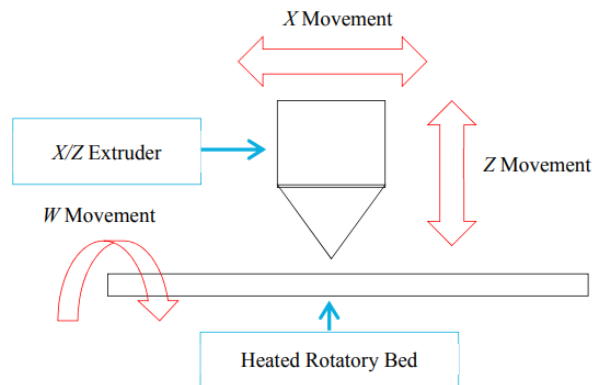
Scheme of 3D Printing process using a rotating mandrel for the manufacture of cylindrical stents [30].
